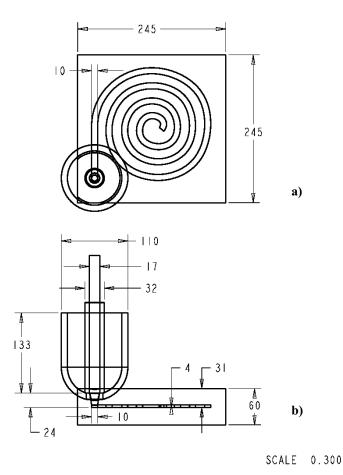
Drawing of new equipment showing a) plan view of pouring cup and b) side section through stopper rod and sand mould (all dimensions are in mm).
